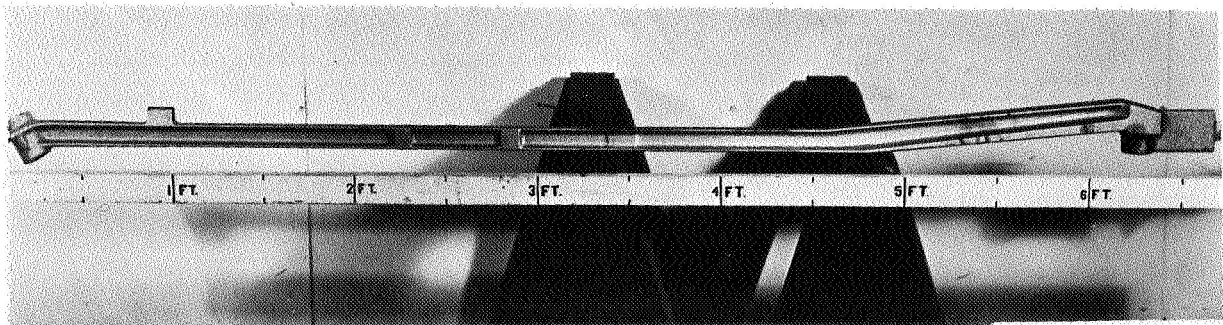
FORGED A-286 ARRESTING GEAR ARM FOR THE T2B
